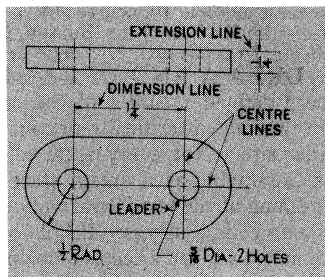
DEFINITIONS OF TERMS USED IN DIMENSIONING DRAWINGS
